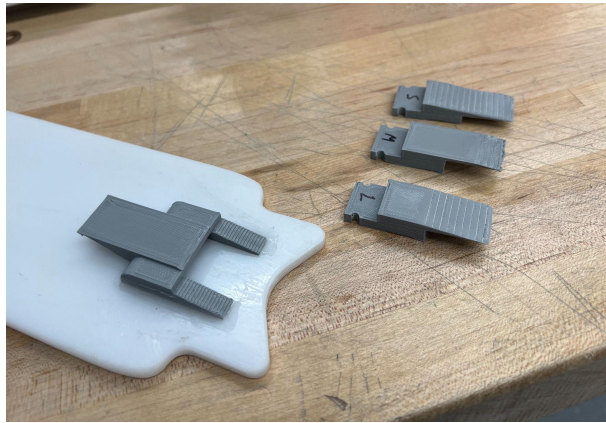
Mounting mechanism and the 3 wedges (small(S), medium(M), large(L)).
